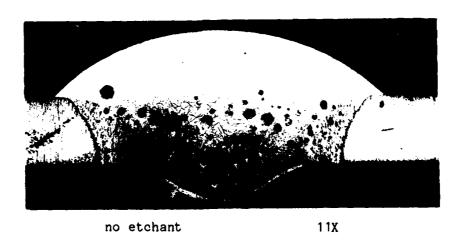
Weld made with no preweld heat treatment, AC, ER5356
